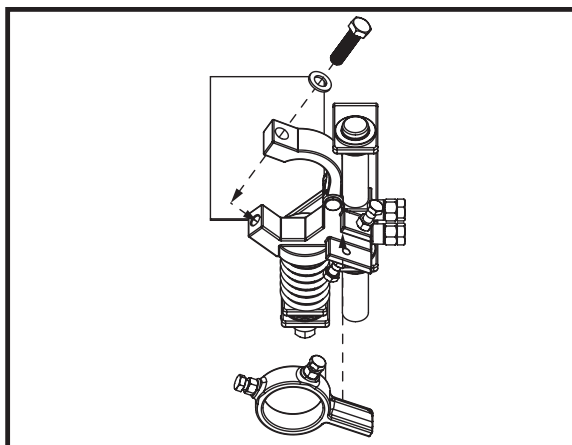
Martin® P2 Secondary Belt Cleaner HD
